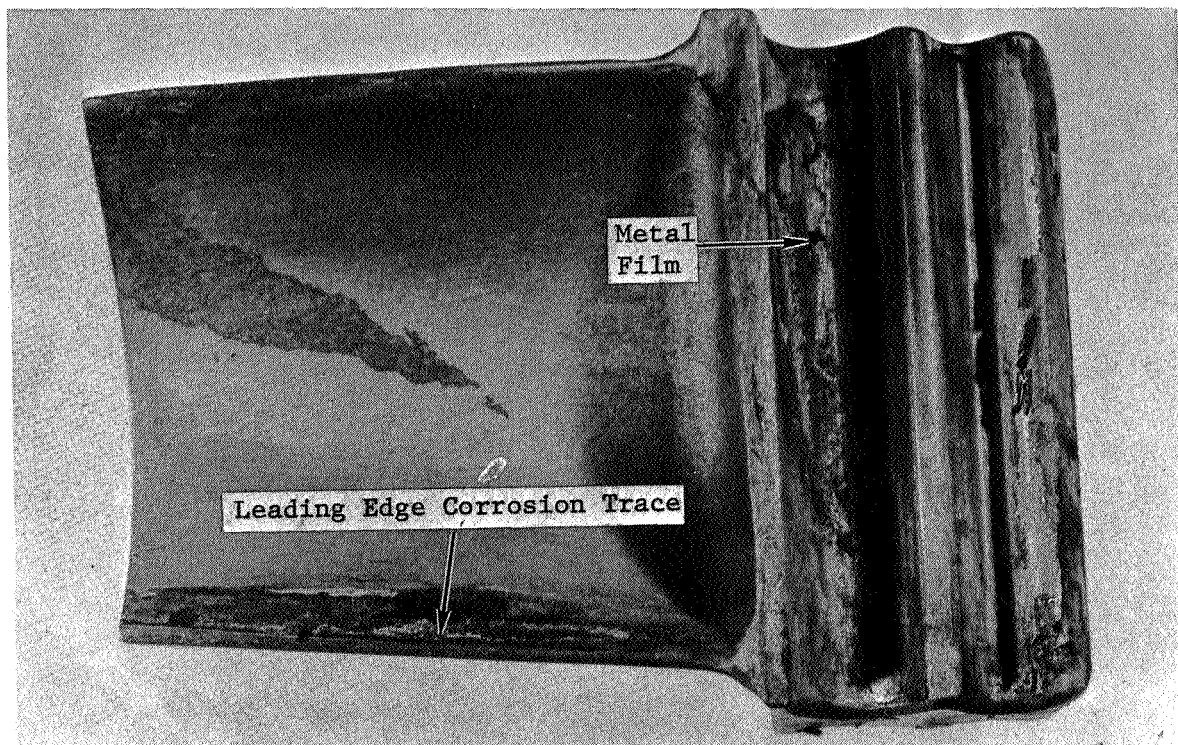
Concave Side of U-700 First Stage Turbine Blade After 2000 Hour Endurance Test. (C66011343)
